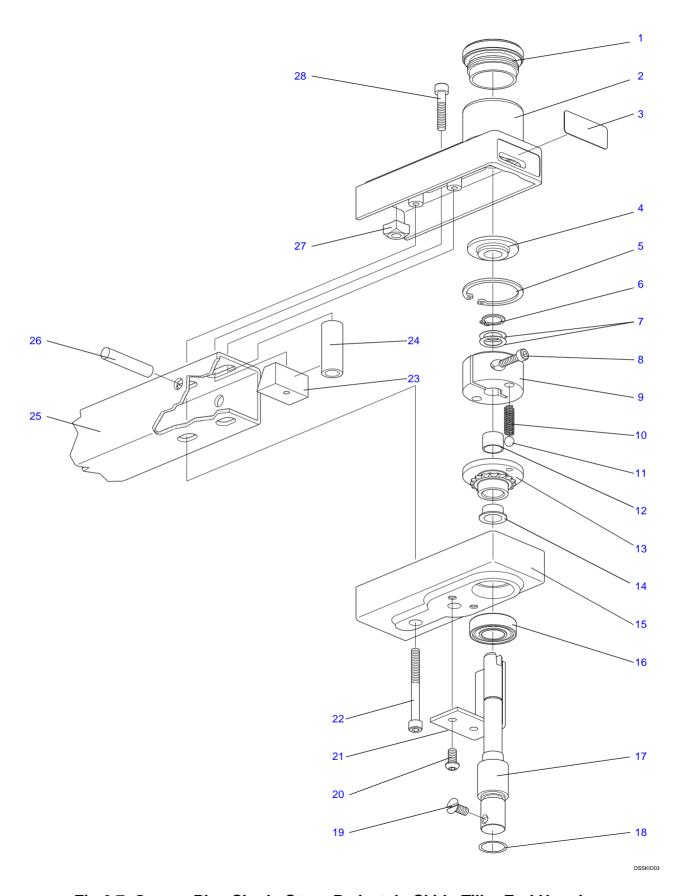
Osprey Plus Single-Stage Pedestal - Skid - Tiller End Housing
